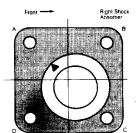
RX7 & 626 Caster & Camber Adjustment Using MacPhearson Strut Support
